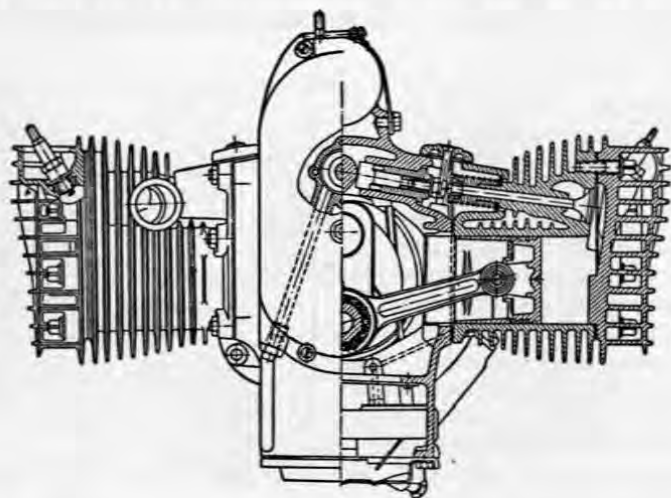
Transverse section of the Soviet M-72 motor-cycle engine.
